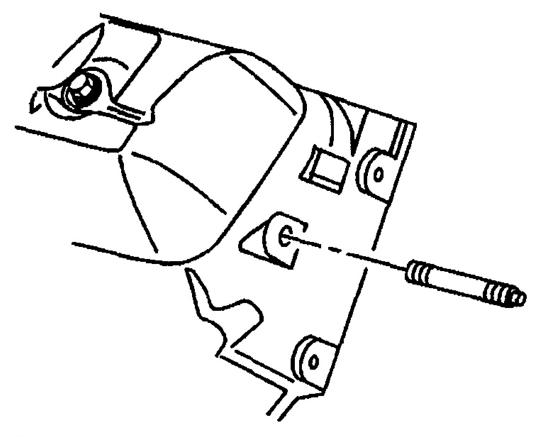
Installing Spark Plug Wire Harness Support Courtesy of GENERAL MOTORS CORP.
